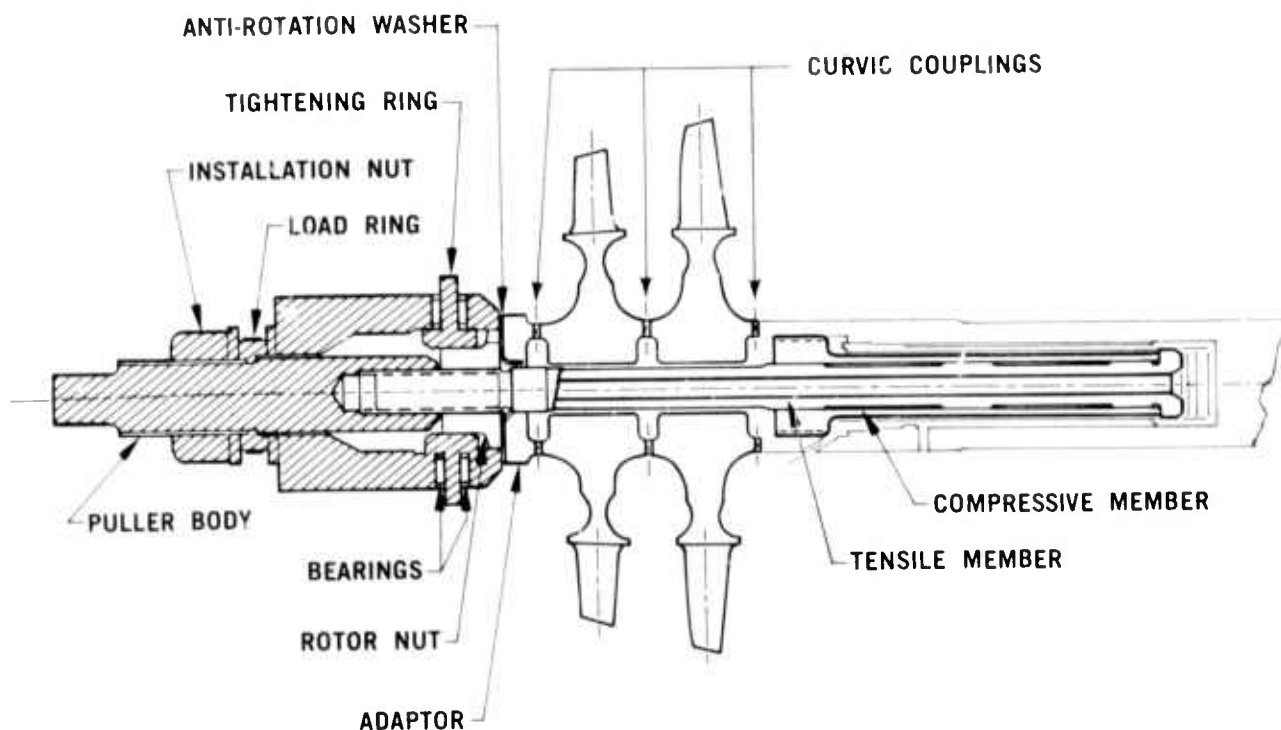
Turbine Rotor and Shaft Assembly Showing Installation Tool
